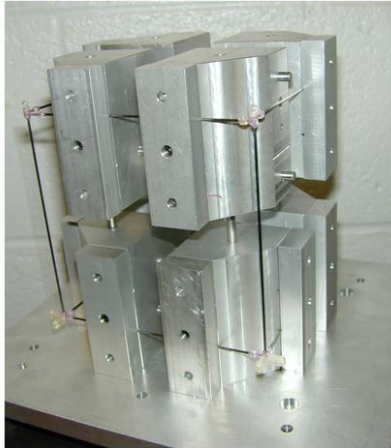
Fixture 3 connecting side components, and hub box made with fixture 3.
